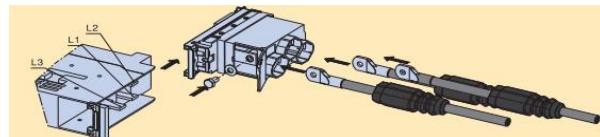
/ Fig. 22: assembly SASILplus double pluggable
